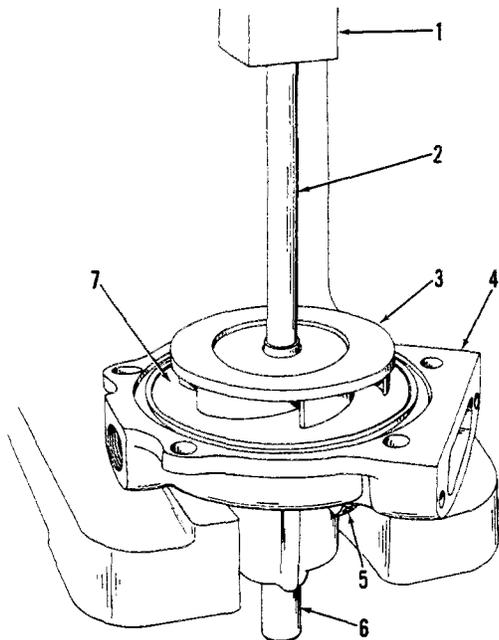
REMOVING IMPELLER, SHAFT, AND BEARING ASSEMBLY (T-51192)
